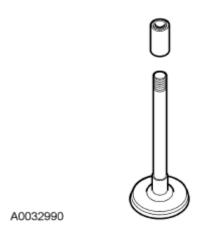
Installing Valve Stem Seal Courtesy of FORD MOTOR CO.
